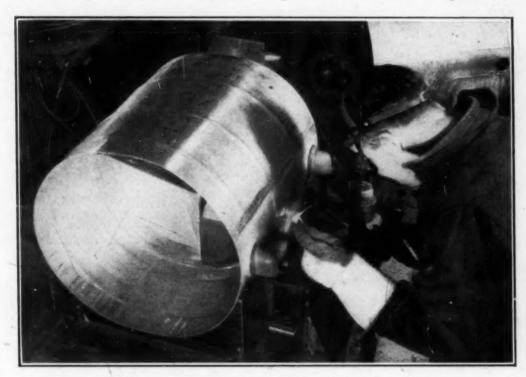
Gas Welding Operation on a Ma Alloy Oil Tank.
